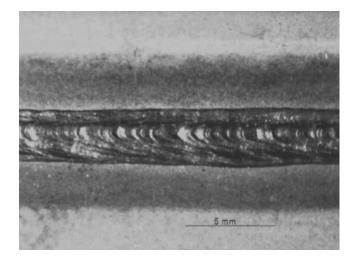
Surface appearance of a lap weld on 1.0 mm galvannealed steel, made with a 4 kW diode laser, welding speed 0.7 m/min, with 25 μ m Al foil inserted between tightly clamped sheets.
